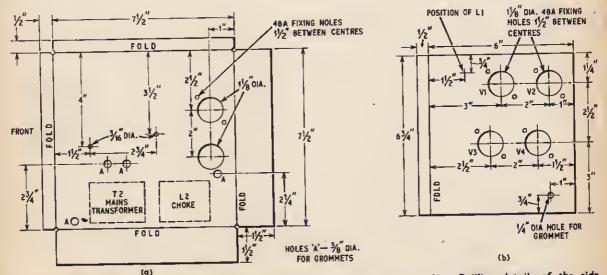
Drilling details of the power unit chossis with suggested positions of T2 and L2 The output transformer T1 will have to be fitted in position after final assembly according to the space available
